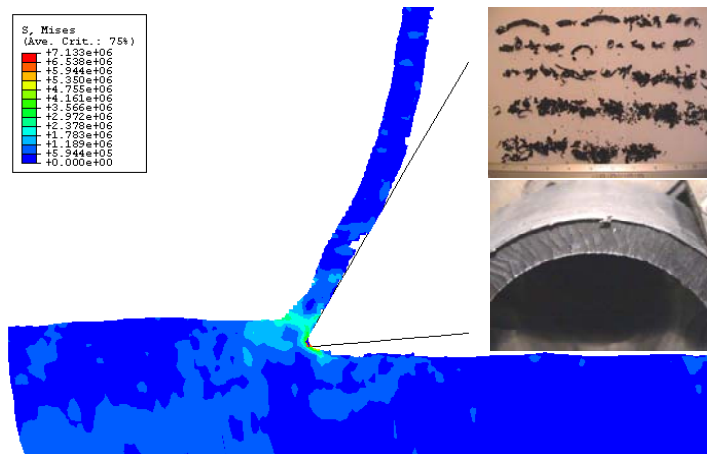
Mixed chip shape and wavy machined surface with a tool of 30° rake angle.
